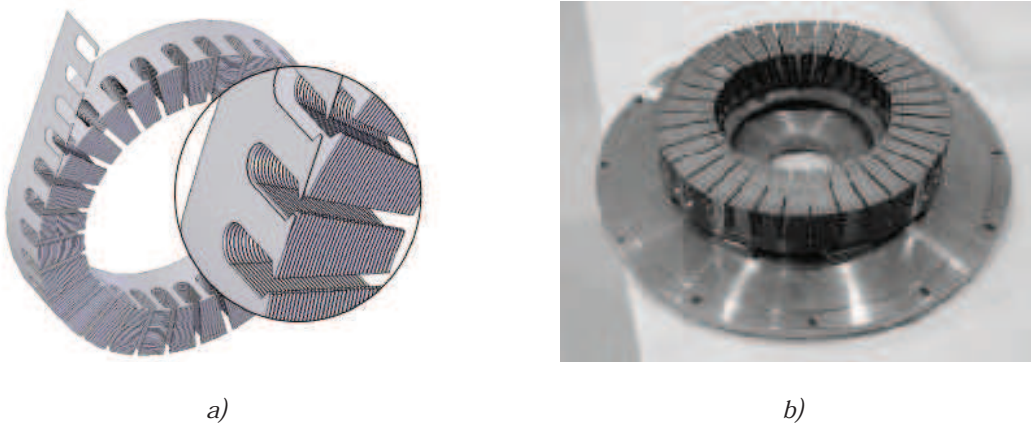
Sheet rolled up in spiral a)method schema[36] and b) real prototype[39]
